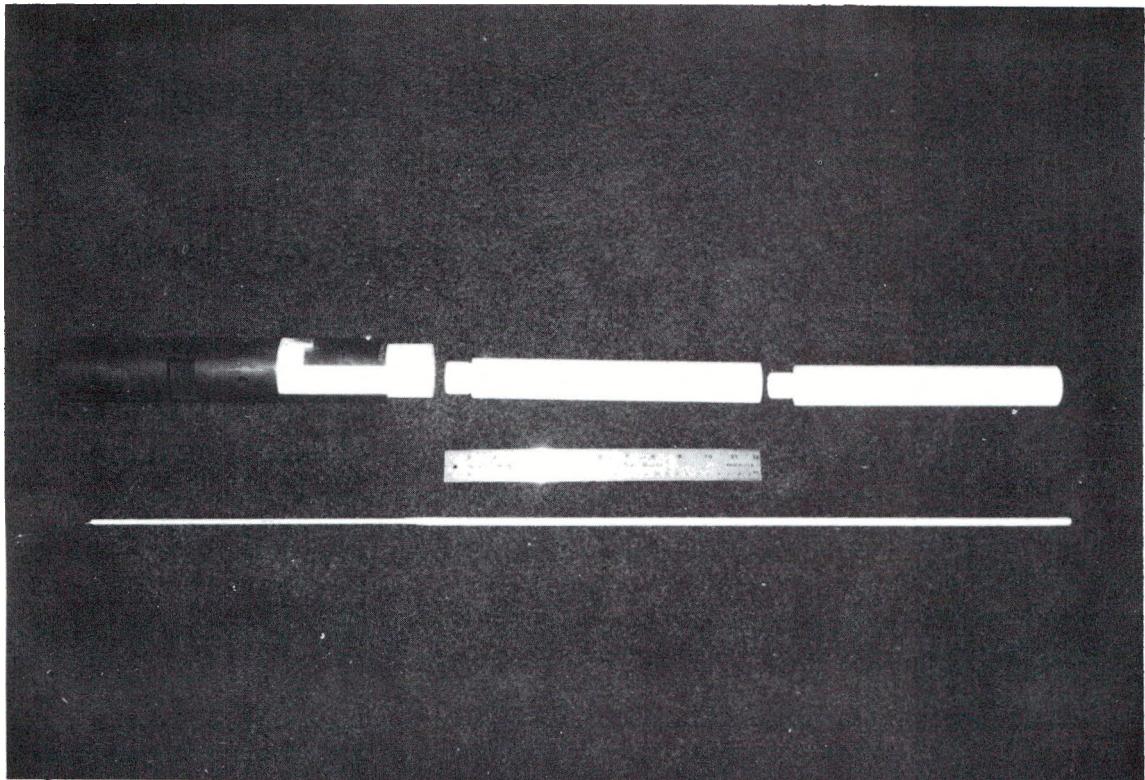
Segmented BN sheath showing fixturing holder and ceramic protection sleeve housing the thermocouple.
